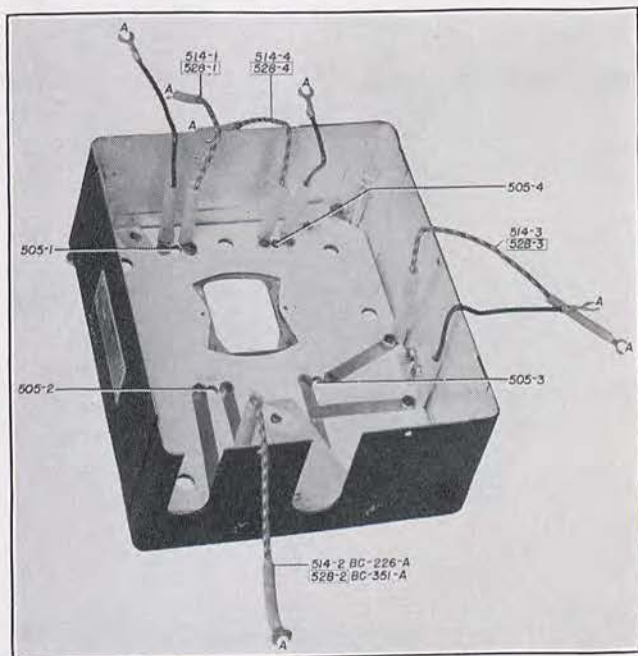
RADIO CONTROL BOX BC-226-A OR BC-351-A, INSIDE VIEW OF COVER
